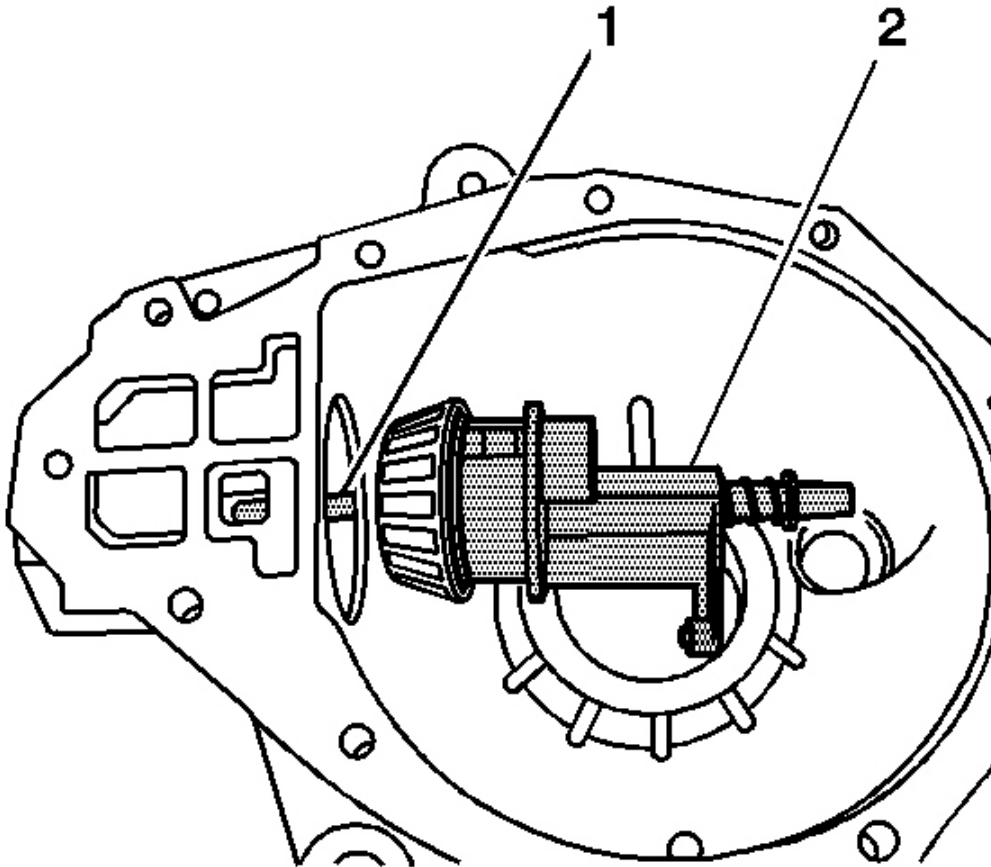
Installed With Inner Pinion Bearing Into Differential Carrier Assembly And Bolt
